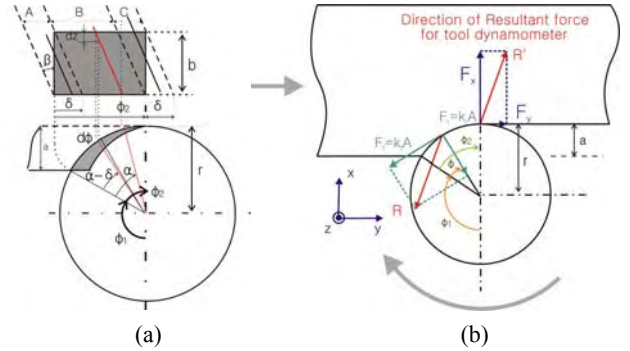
Unfolded surface of cut (a) and Cutting forces (b) in down end milling
